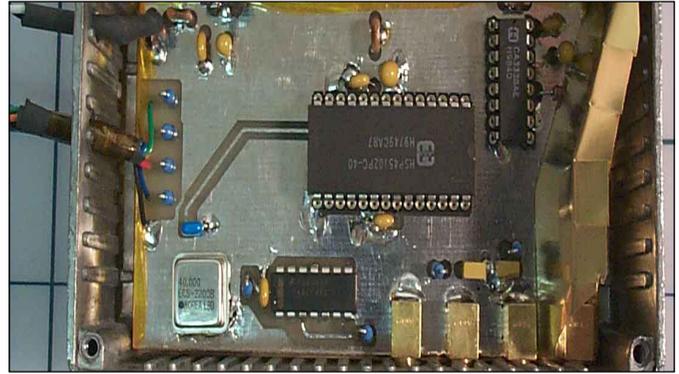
All major circuit blocks in the source are designed to be mounted in low-cost, die-cast enclosures from Jameco. Here is a view of a completed NCO board with some added shielding (on the right side) around the 10.7-MHz filter to reduce any clock feed-through to the 10.7 MHz PLL reference signal.
